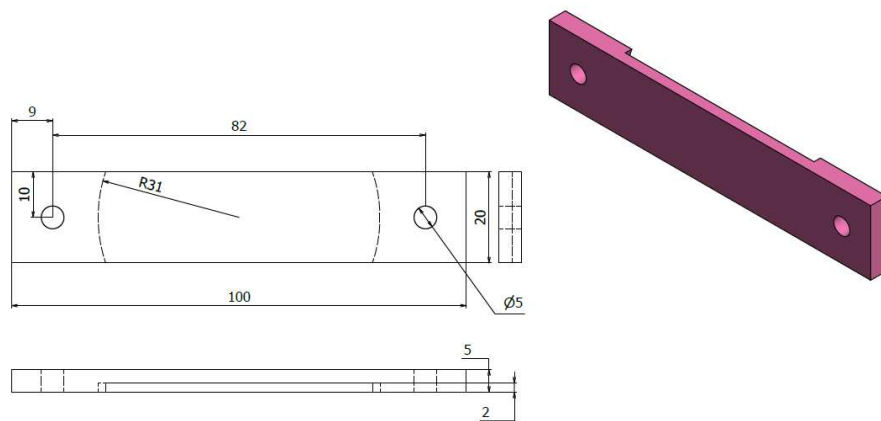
A drawing of the PMT holder of new prototype water Čerenkov detector. The unit is mm.
